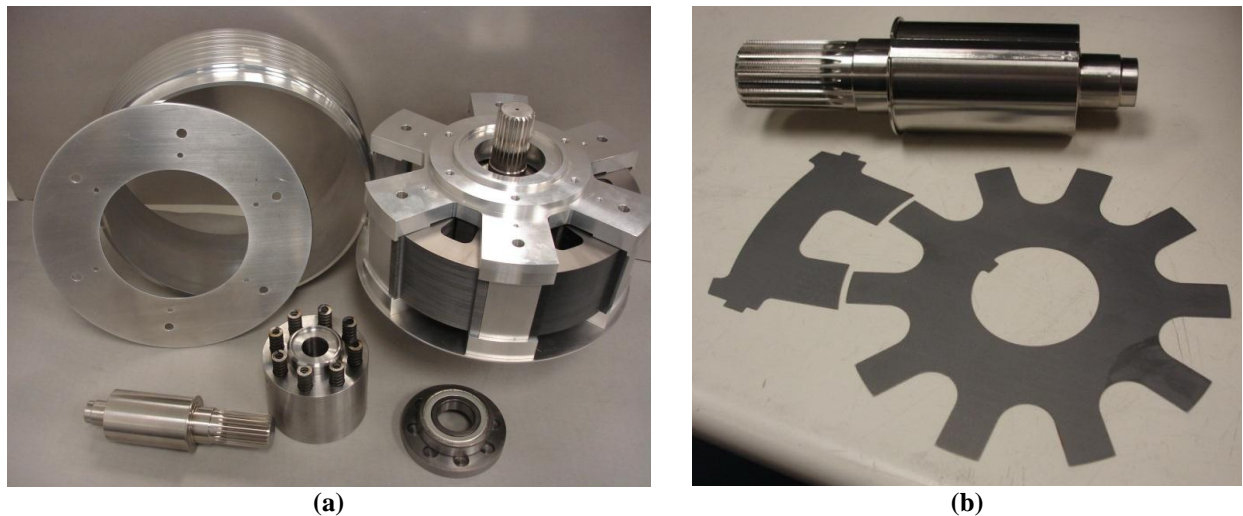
High tolerance parts for the IMFP SRM: (a) fabricated parts and (b) stator and rotor laminations with rotor shaft.
